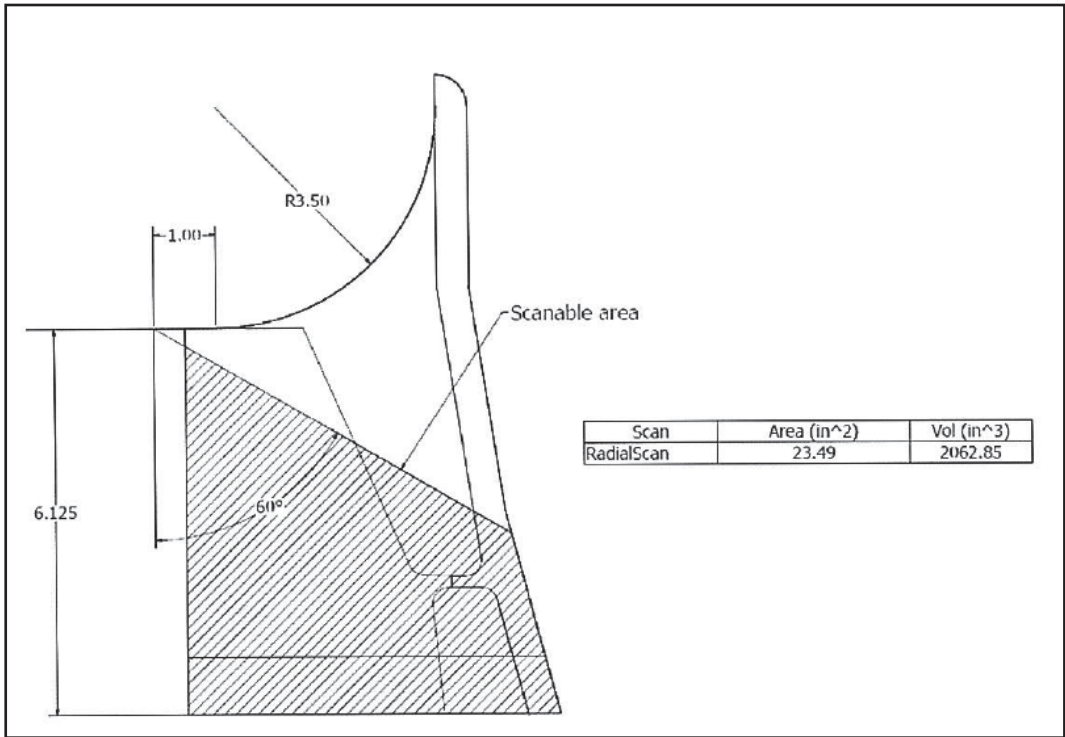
Weld N2H-NV, Achievable Radial Coverage
